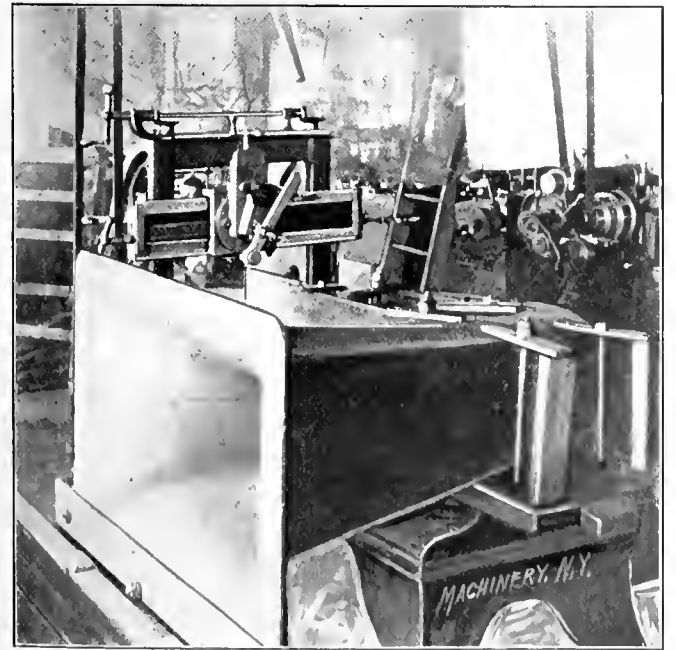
Method of Planing a Large Casting on a Small Planer.
